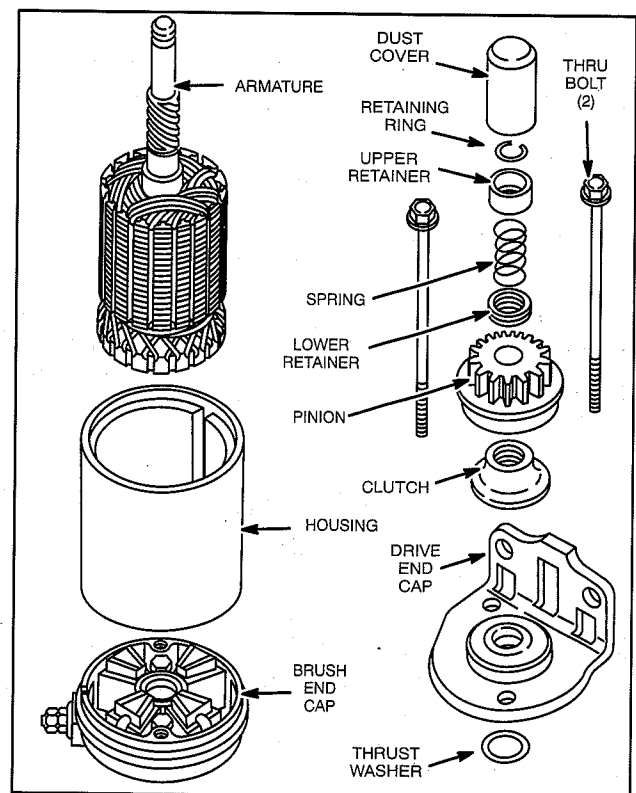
Exploded View - Starter Motor With Steel Pinion
